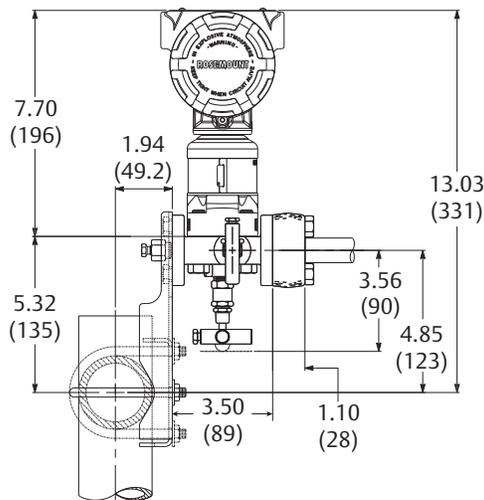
Traditional Manifold with Optional Brackets for 2-in. Pipe Mounting
